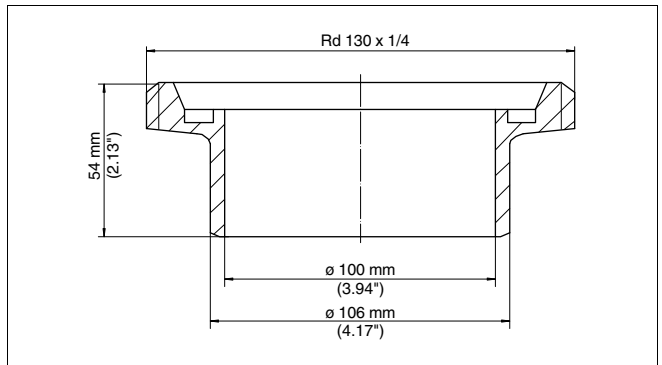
Dimensions welded socket, bolting DN 100 according to DIN 11851
